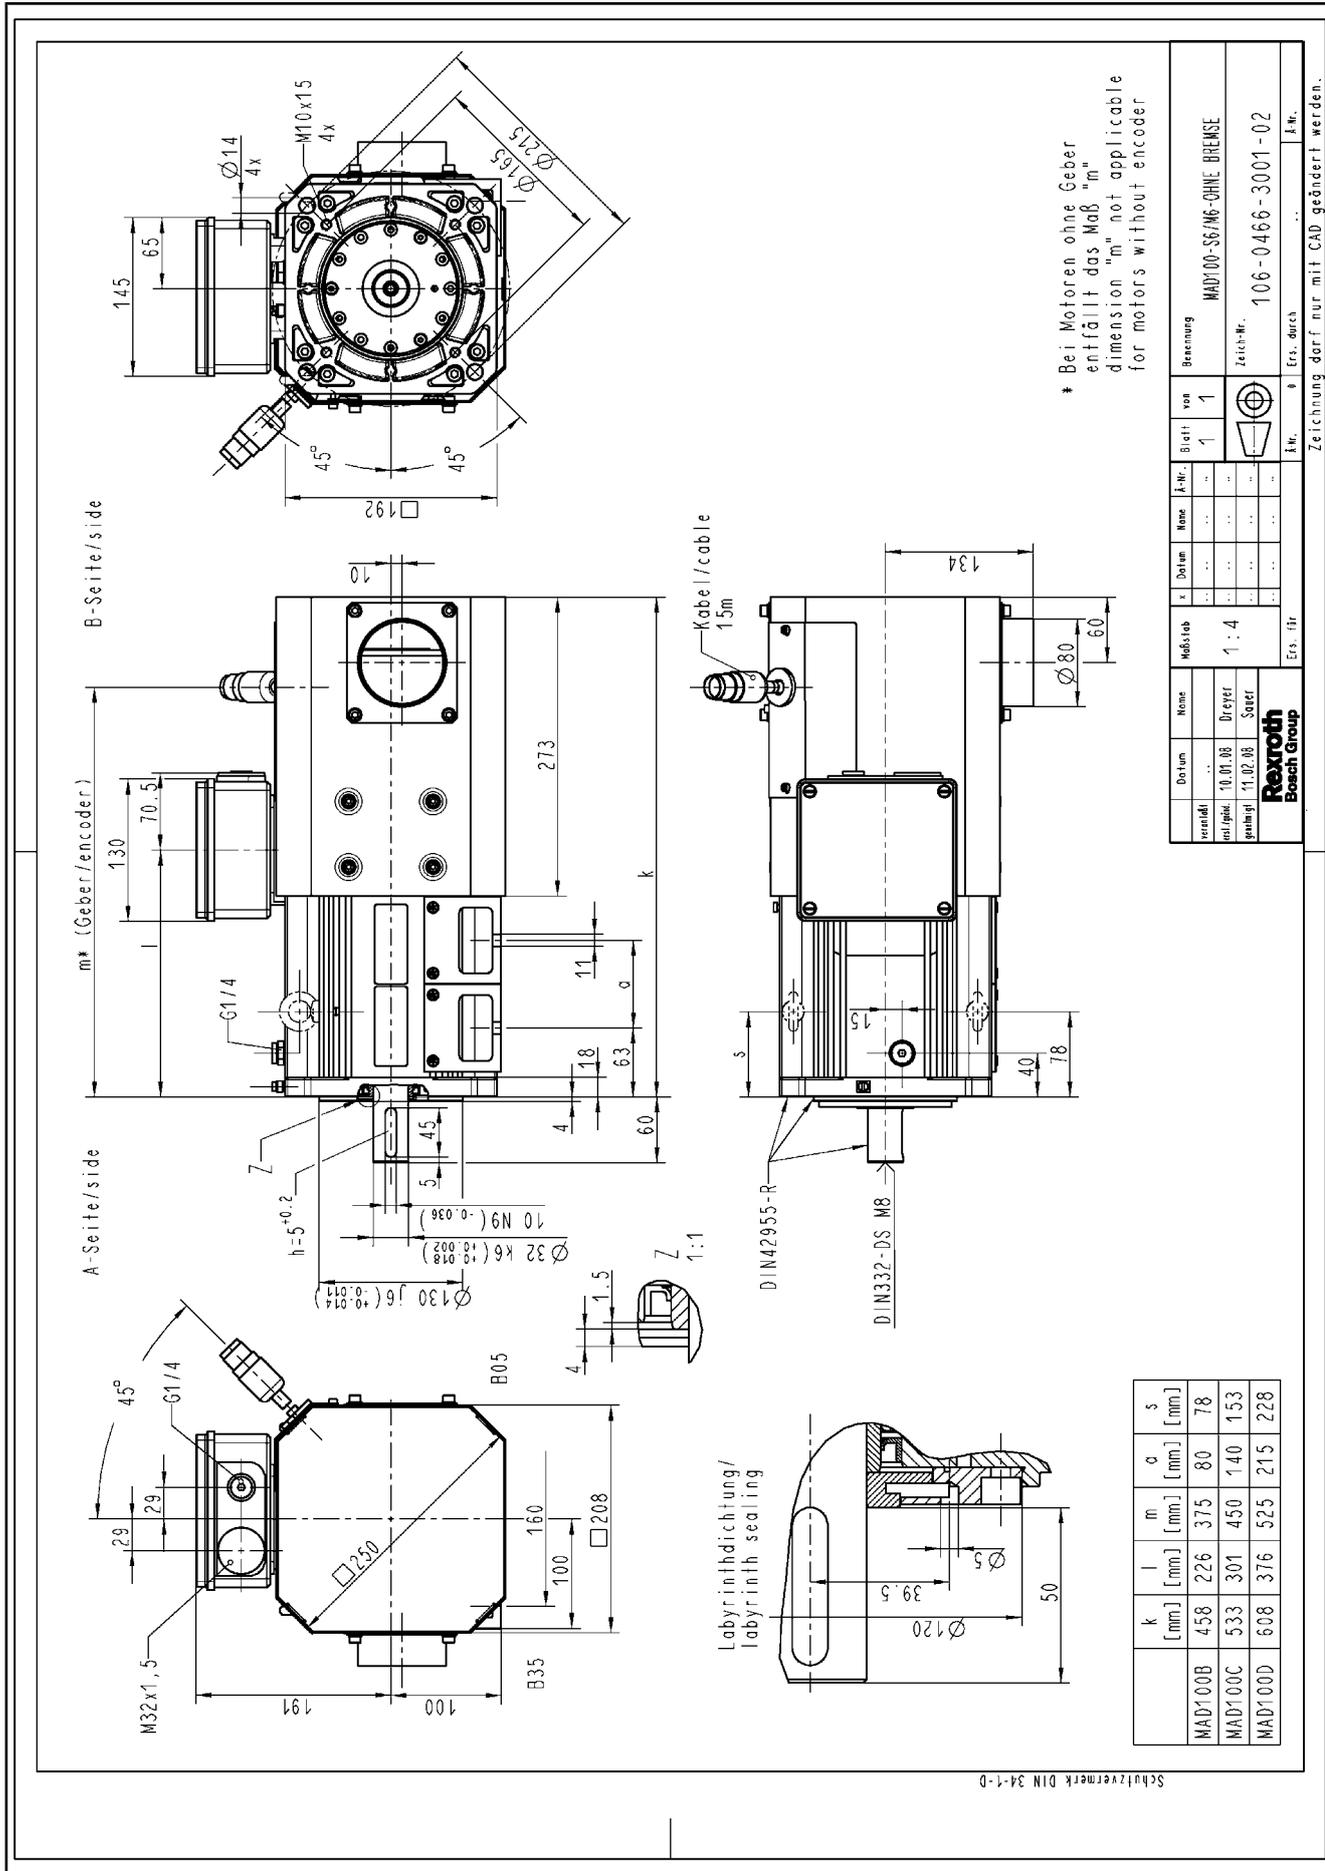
Dimension sheet MAD100 with encoder M6 or S6, without brake
